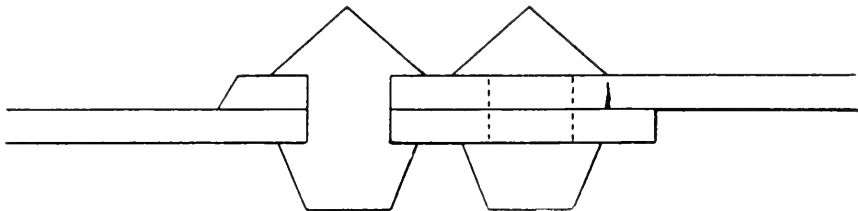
A HIDDEN CRACK UNDER THE OUTER EDGE OF THE RIVET HEADS.
